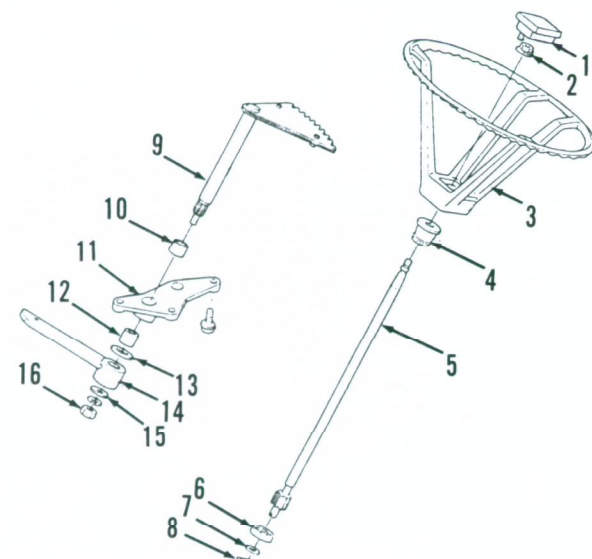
Exploded view of steering gear assembly used on all tractors.
